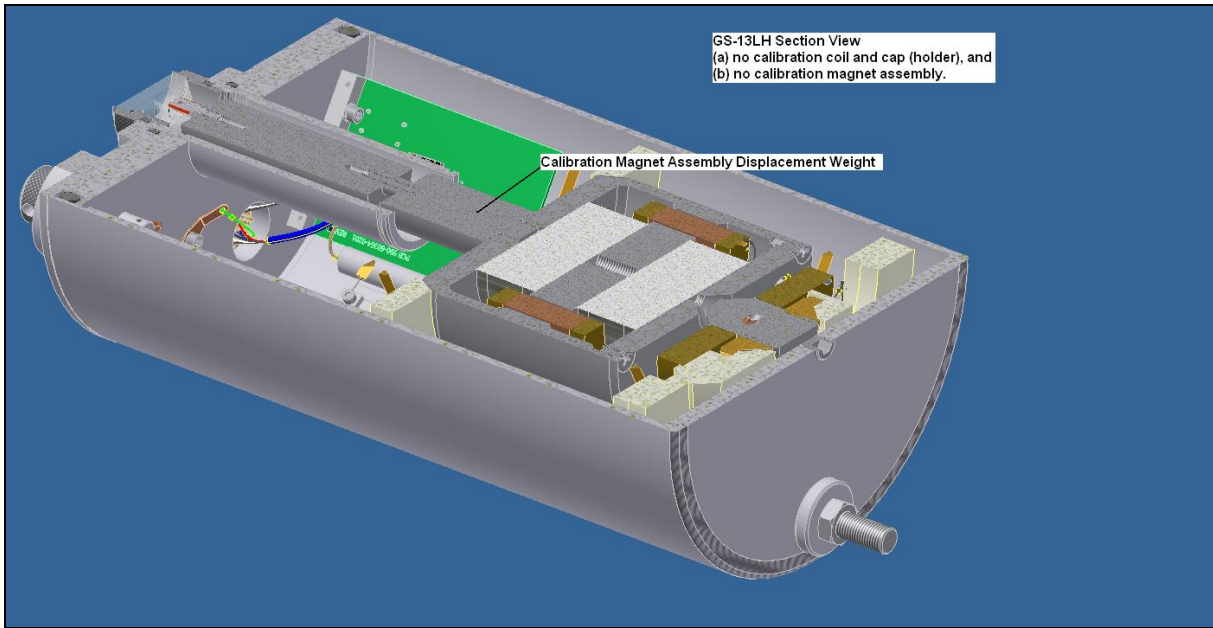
GS-13LH Section View of Previous Calibration Coil Area.
